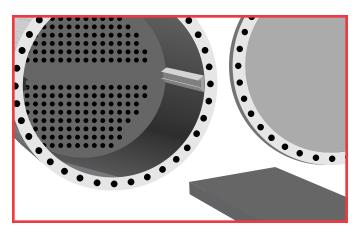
Coat inlet areas, baffle plate inserts and end covers for complete protection of equipment.
